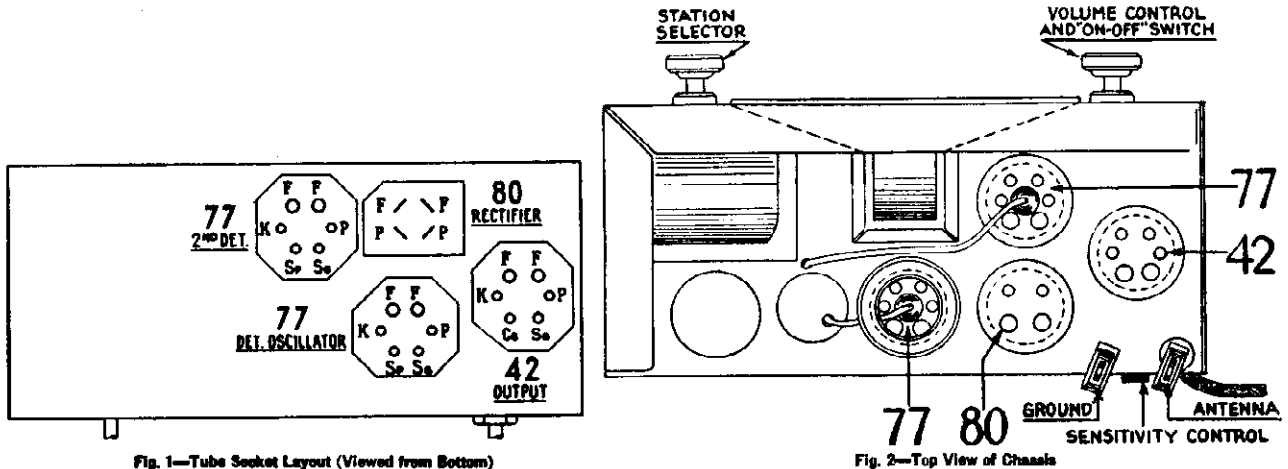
Tube Socket Layout (Viewed from Bottom)
